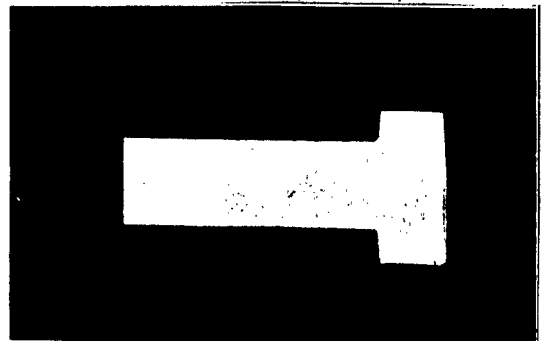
Spyker bolt like Fig. 7 (magnified) sawed through in order to show abrupt transition from body to head better.
